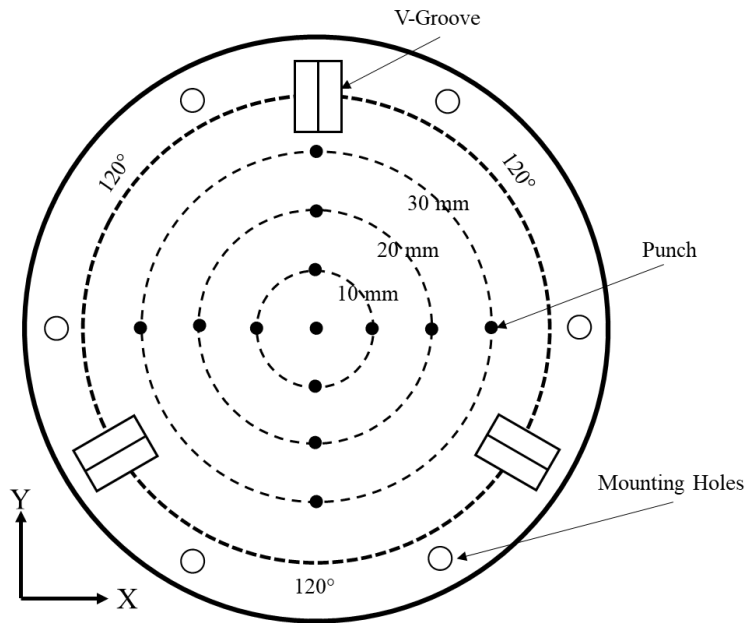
Layout of primary mold inserts, showing locations of cylindrical pins and v-grooves.
